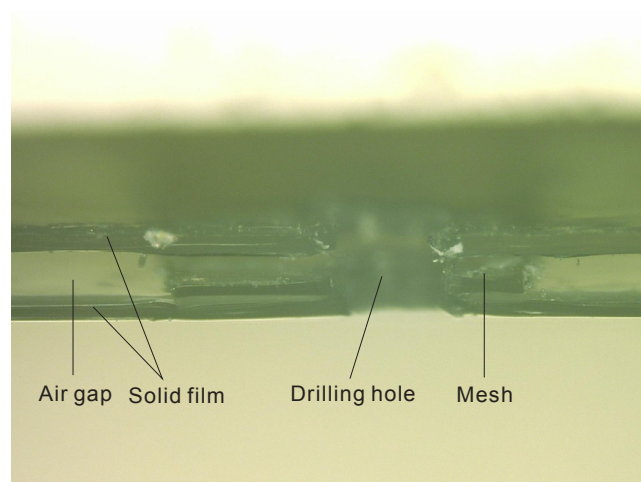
Image of a welding point. Imperfect welding led to some additional separation between the outer films and the grid.
